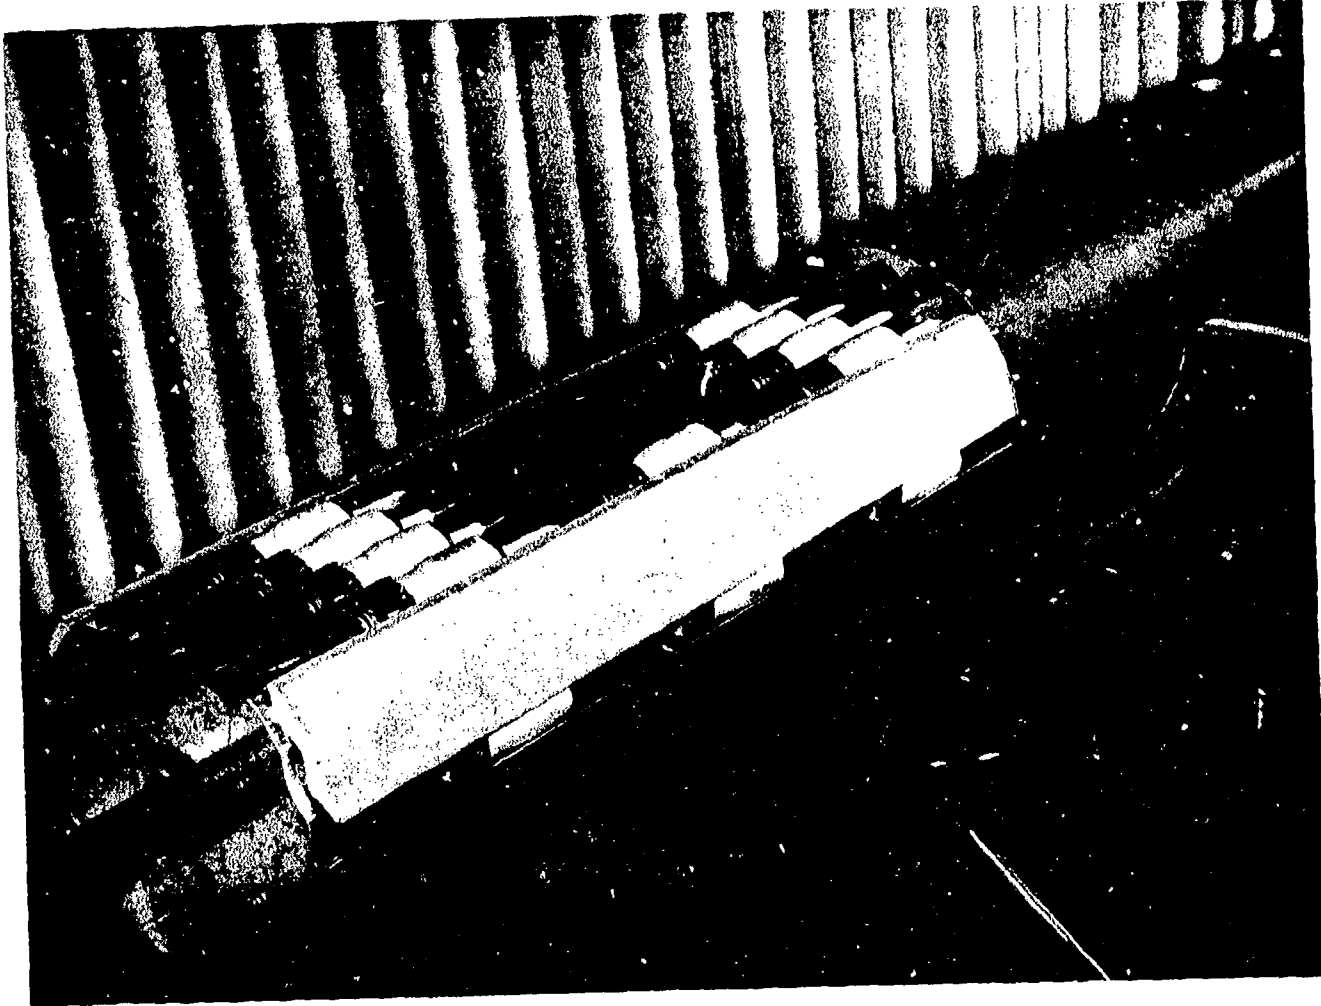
LOADING BOMBLETS INTO DISPENSER
